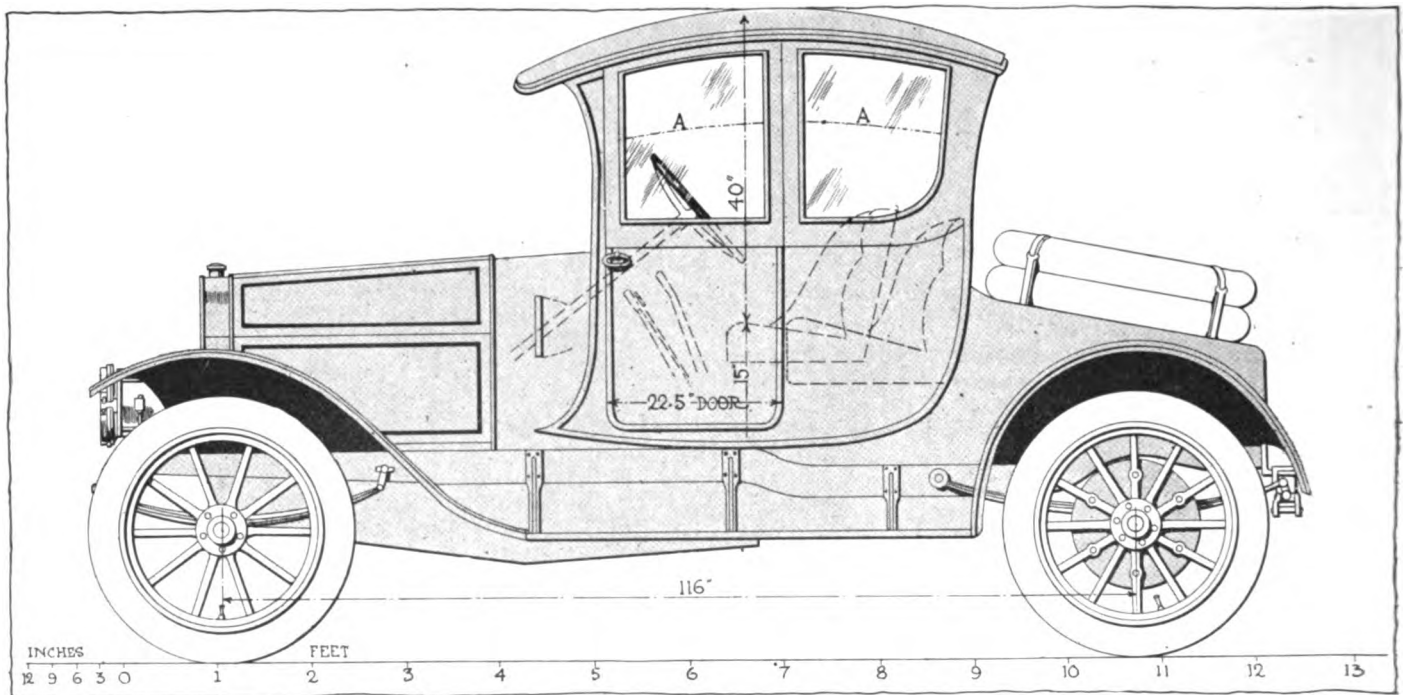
Side view to scale of coupé design for 1911 Cadillac runabout
